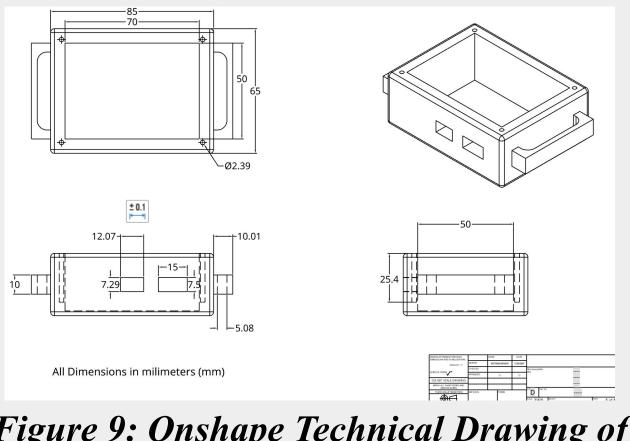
Onshape Technical Drawing of Microcontroller Housing Unit
